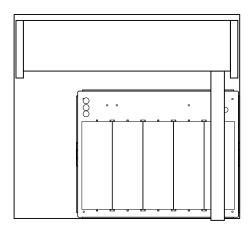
Code 20-Series Insert on Locator Plate with Racks Installed
